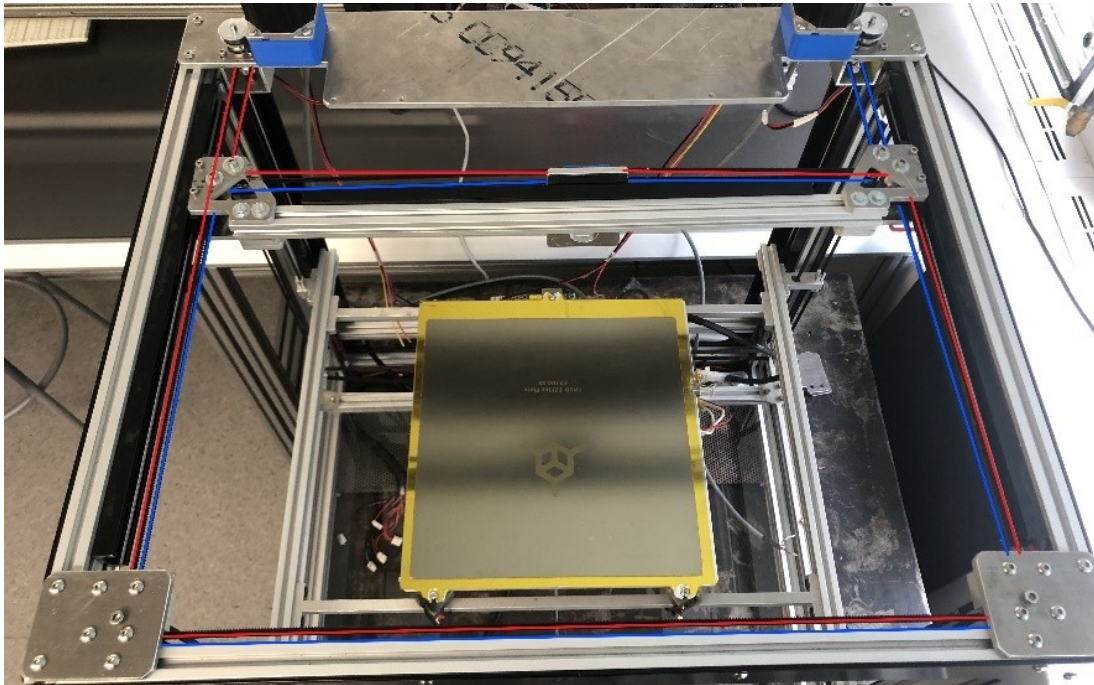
CoreXY drive. Top belt is shown in red and the bottom belt is shown in blue.
